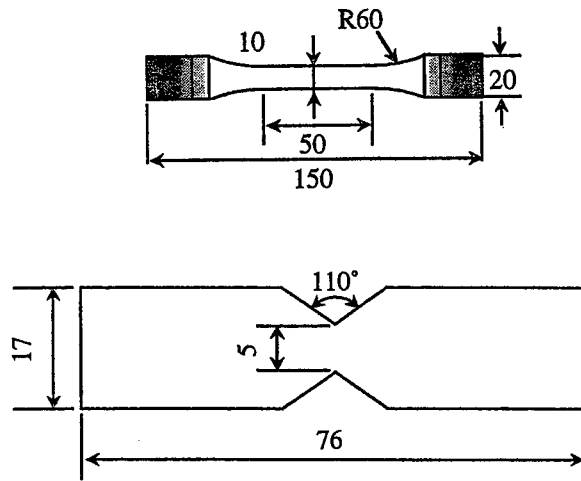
Specimen configurations for tensile (a) and in-plane shear (b) tests.
